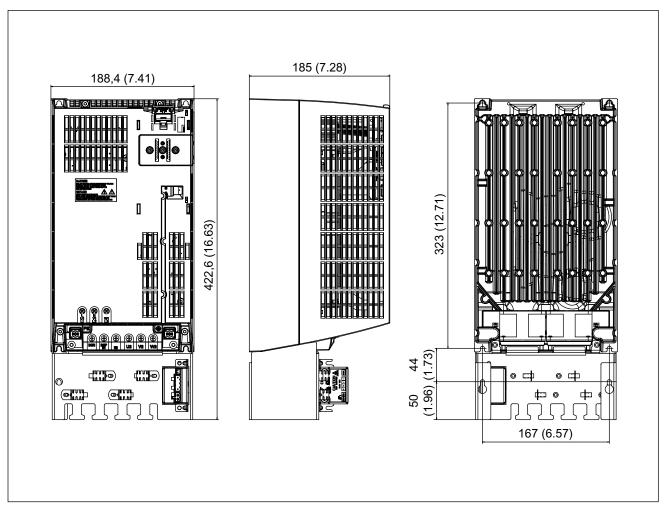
Dimension drawing: Power Module PM340 with Screening Kit and Brake Relay, frame size FSC
